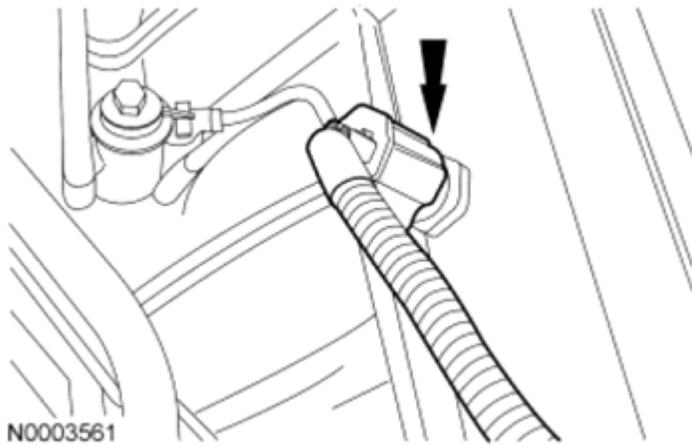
Locating Cylinder Head Temperature (CHT) Sensor Electrical Connector
